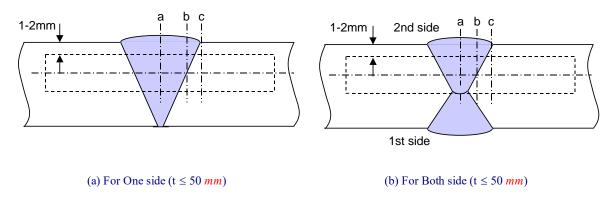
Welding Procedure Qualification Test Assemblies (Unit: mm) (Continued)
